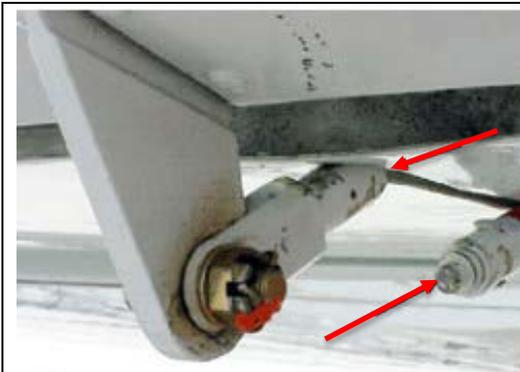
Beech King Air C90 Failed elevator trim tab push rod due to fatigue.
